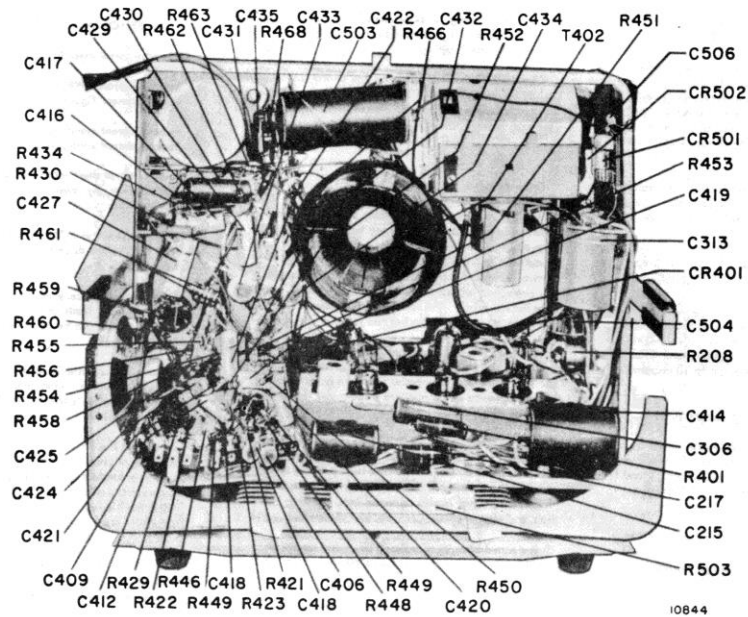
Wiring Side of 14" Picture Tube Chassis.
